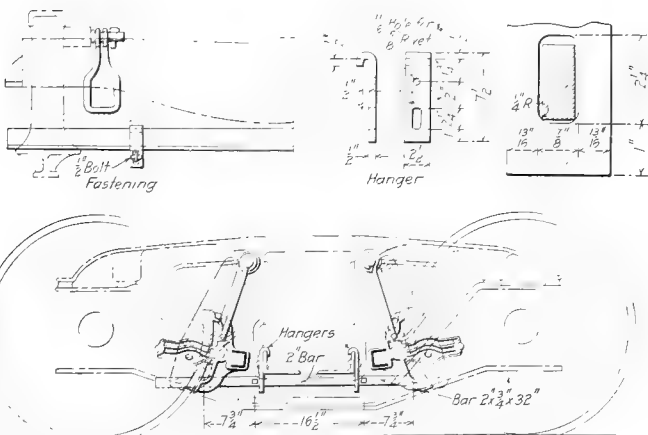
Brake Beam Safety Hanger. American Steel Foundries.
